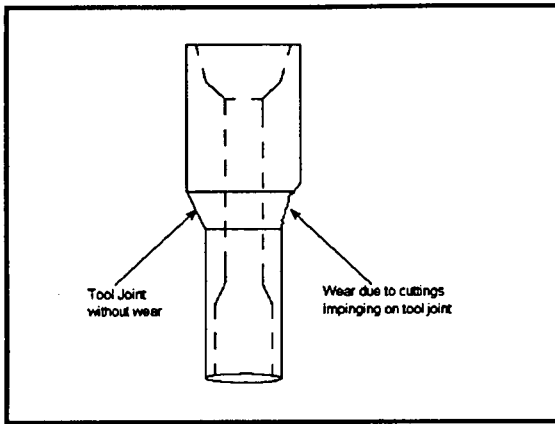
Erosion of tool joint due to cuttings and air.
